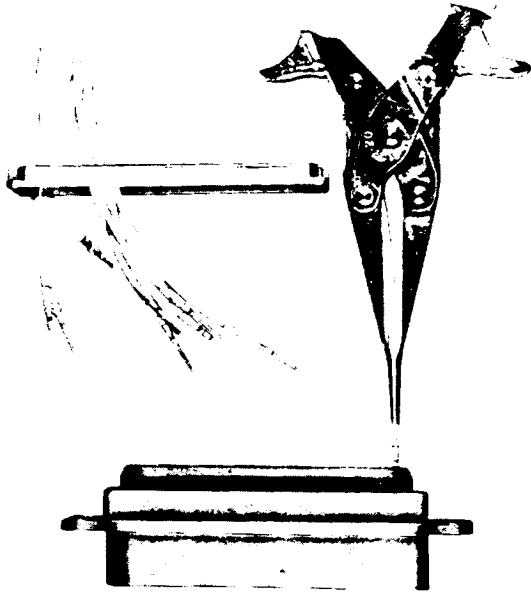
Removing Compression Sleeve and Inserting Size 20/16 WW Contact
